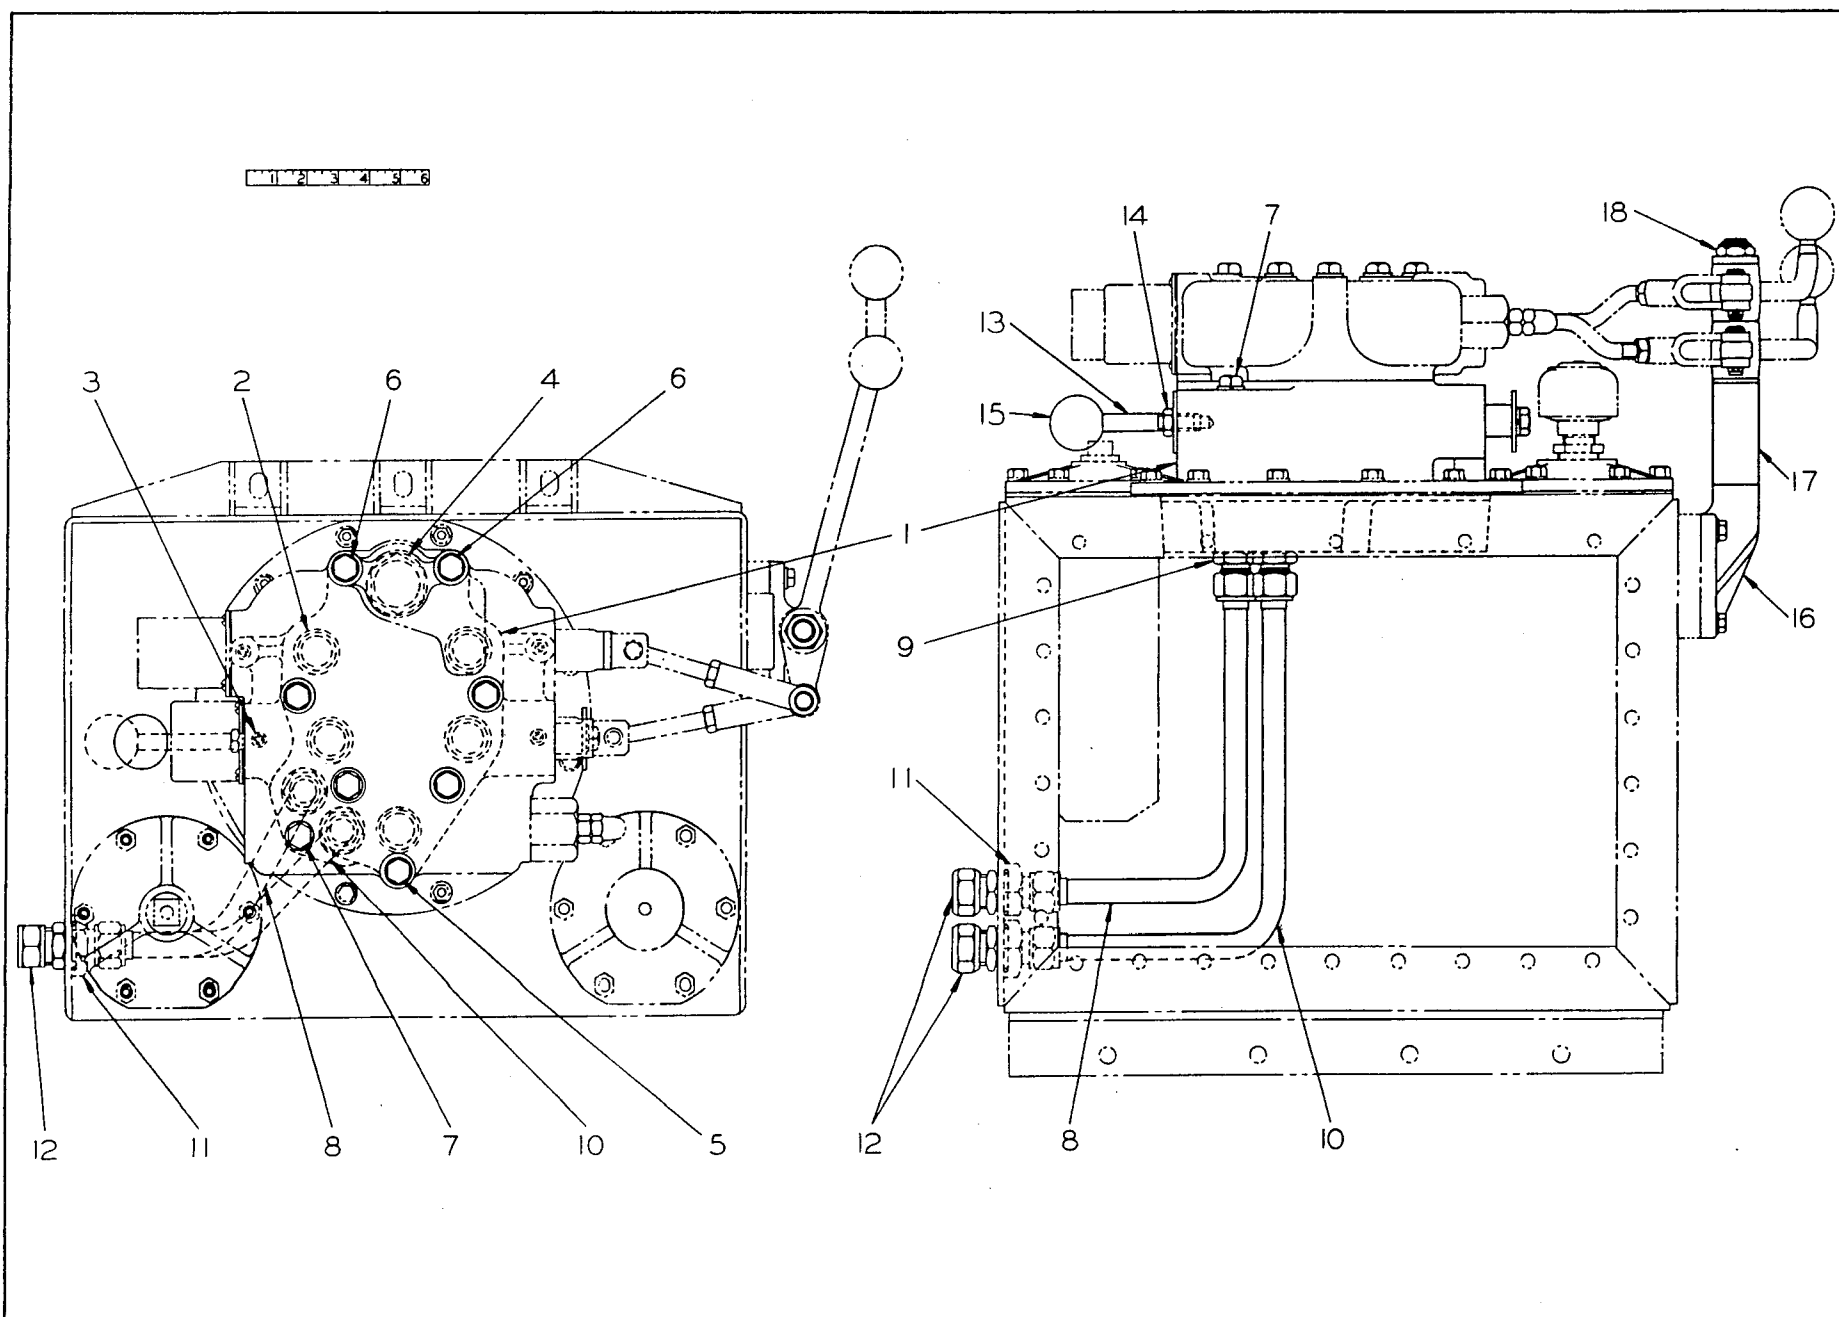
HYDRAULIC REAR PIPING TAKE-OFF KIT
